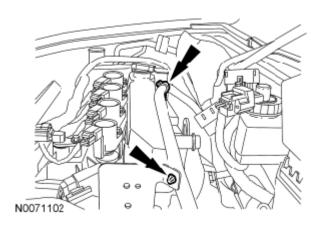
Locating Battery Cable Wire Harness Retainers Courtesy of FORD MOTOR CO.
